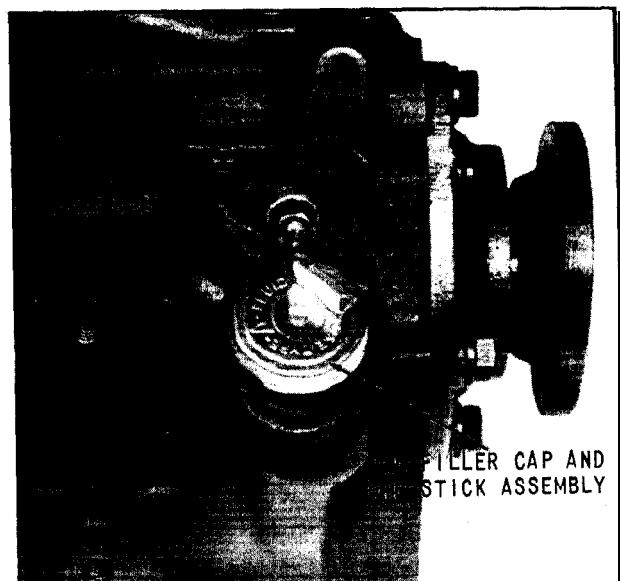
Installation of Oil Filler Cap and Dipstick Assembly
